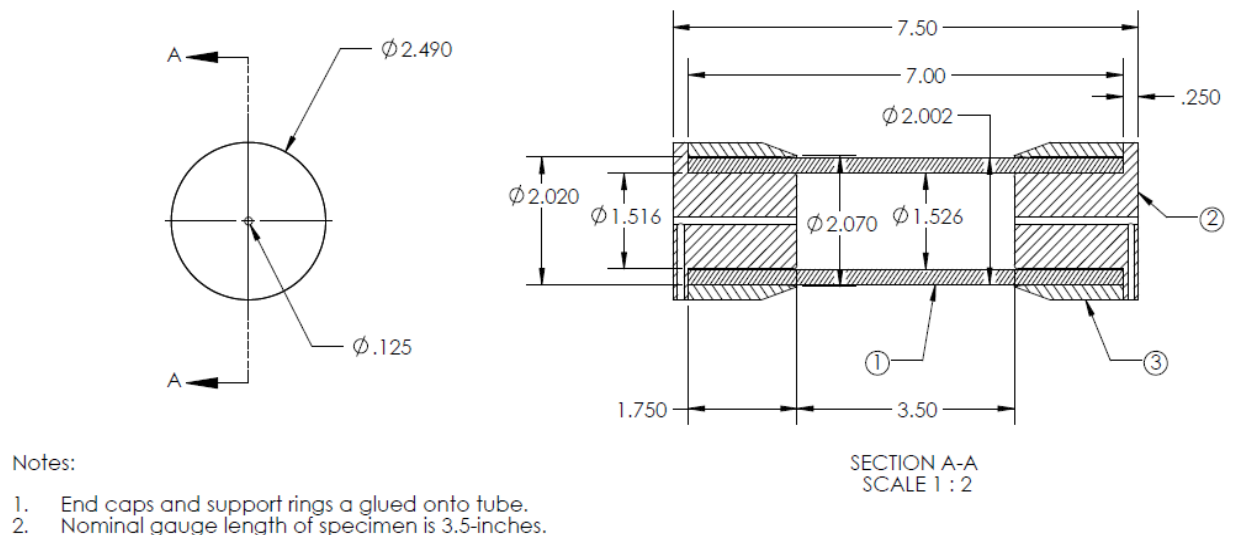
Drawing of 2.0-inch-diameter compression specimen.
